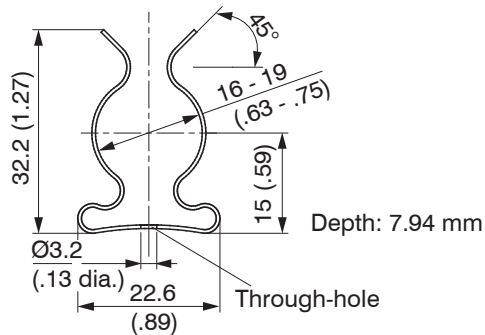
Dimensional drawing of mounting clamp, dimensions in mm (inches)
